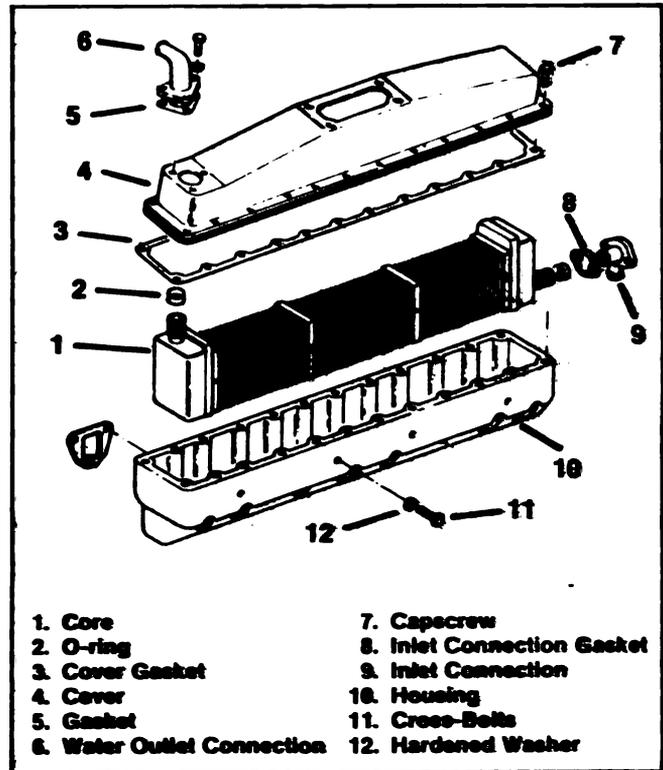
(N10099). Cross-Bolt Design Aftercooler — Exploded View.
